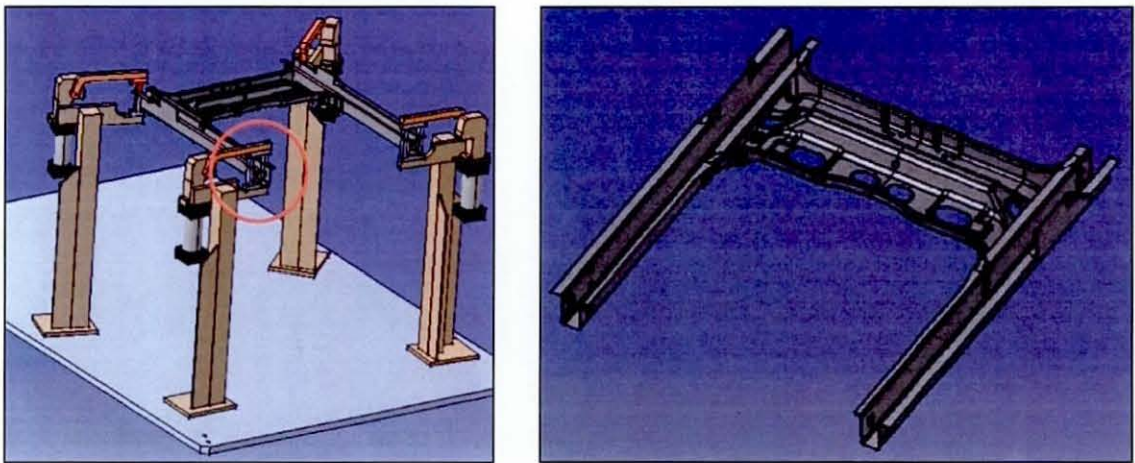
Deformable aluminium floorpan assembly and assembly fixture
